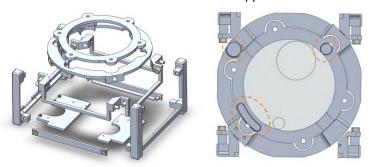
Bottom exploded view of TPM structural components (left)/ Bottom view with marked actuation contact features
